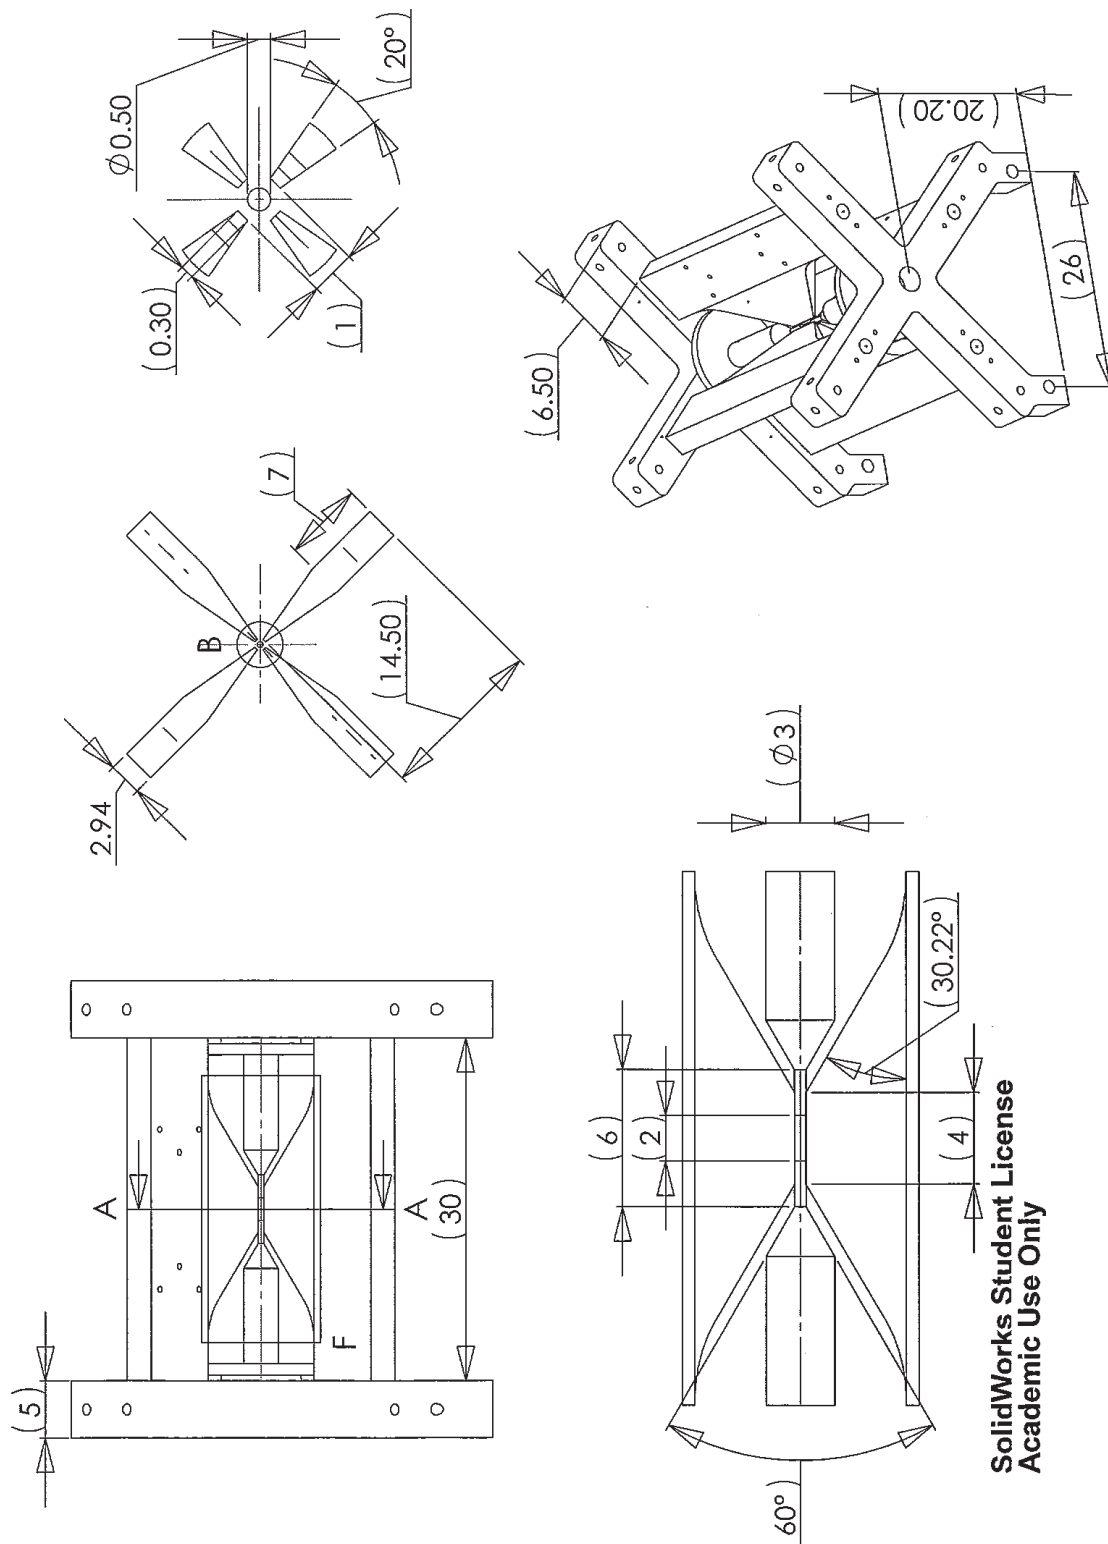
Technical drawings of the trap. All dimensions in mm.
